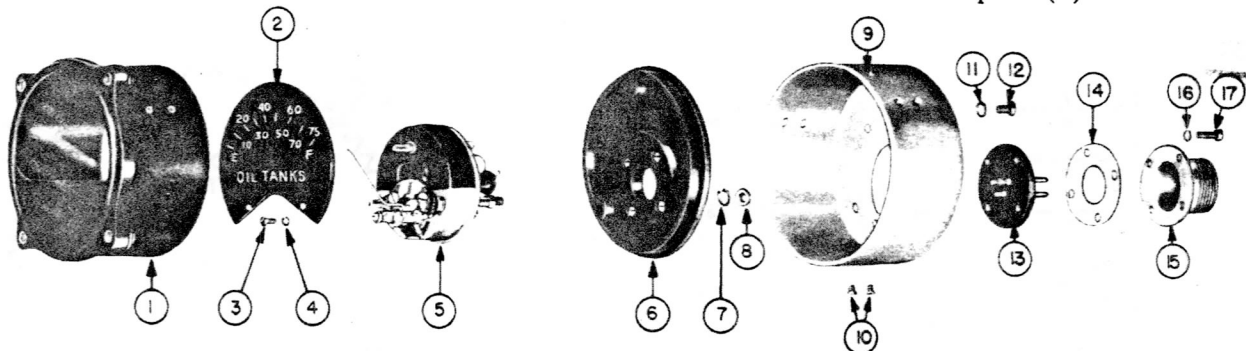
Case, Shield, Scale, Receptacle, and Base Removal—Model 728, Type 11 (Part No. 113665) Liquidometer EA-36
